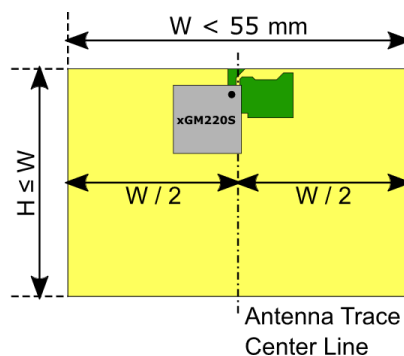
Recommended Small PCB Layout – Solid GND Fill
